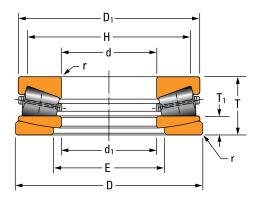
Type TTHDFLSA thrust tapered roller bearing assembly.
